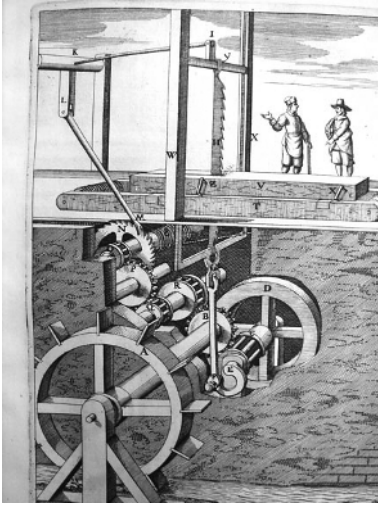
Log-cutting machine drawing of G.A. Böckler (1662)
